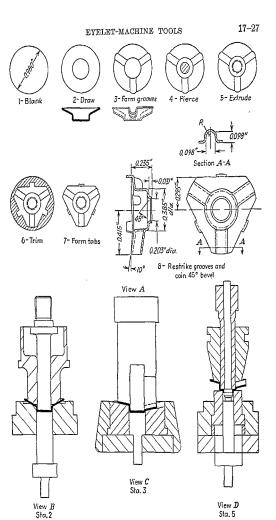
Eyelet machine fabrication of an alumnum part: view A, part development; views B, C, D die details. (Brighton Dirision, Advance Stamping Co.)
